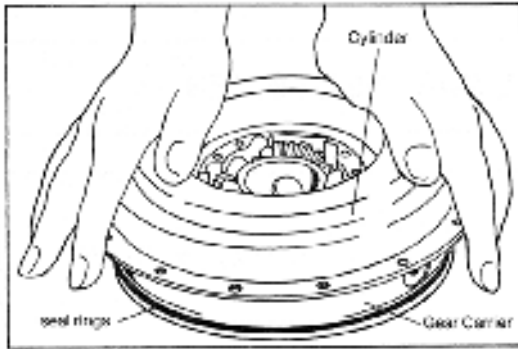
Pressing Cylinder on Bevel Gear Carrier
